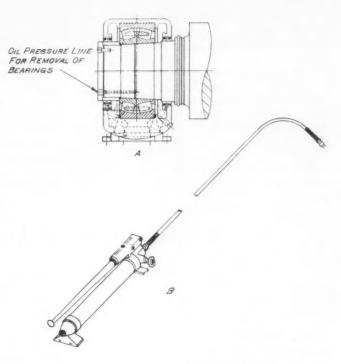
Special device shown at (8) is used to inject high-pressure oil into bore of large bearings, such as the one seen at (A), to facilitate both installation and removal
